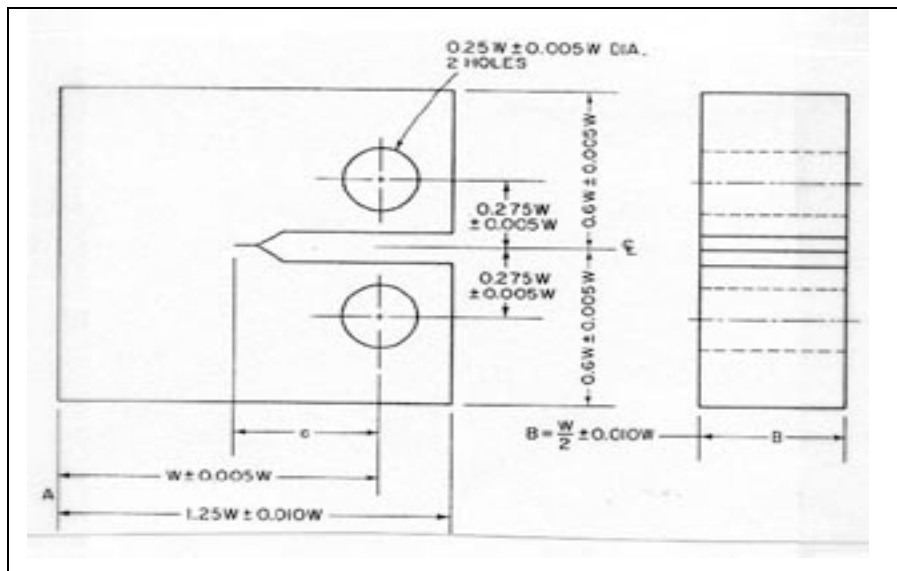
Compact tension specimen used for J-integral and crack growth testing of ESW metal
